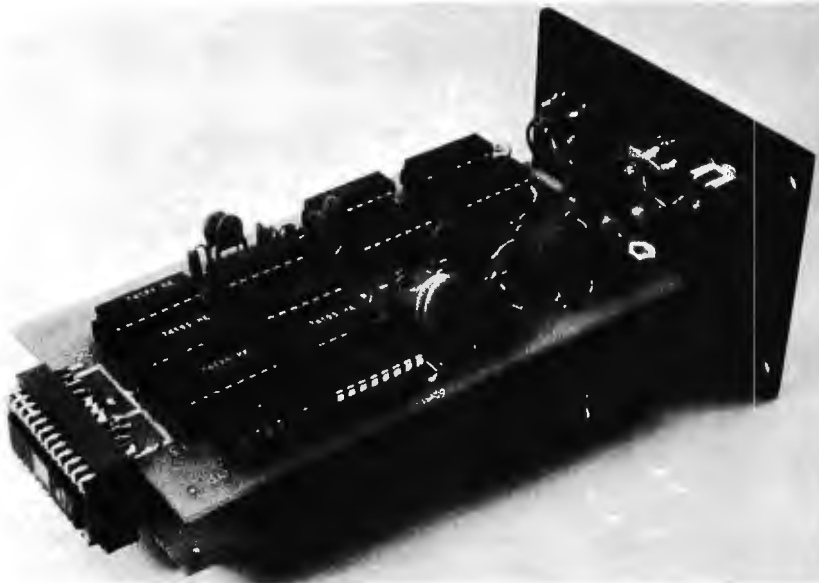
The Solid State Sales Video Camera Kit, as assembled. The kit includes the two printed circuit boards and all electronic parts, but does not include the packaging into a neat box with lenses, etc. The charge coupled device sensor is shown mounted between the two boards in this photograph.
